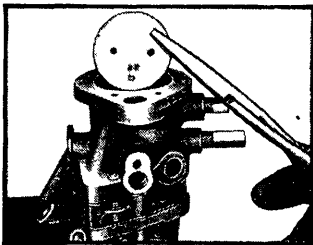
Install throttle valve. Small "c" in circle or part number should be toward idle port when viewing casting from manifold side. Center throttle valve by tapping lightly and hold in place with fingers before tightening screws
